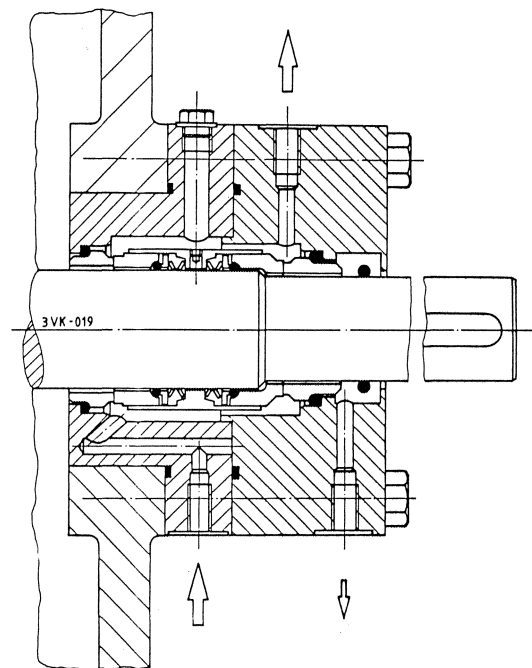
Traditional Mechanical Seal Used on Transmission Side of Rotary Screw Compressor.
